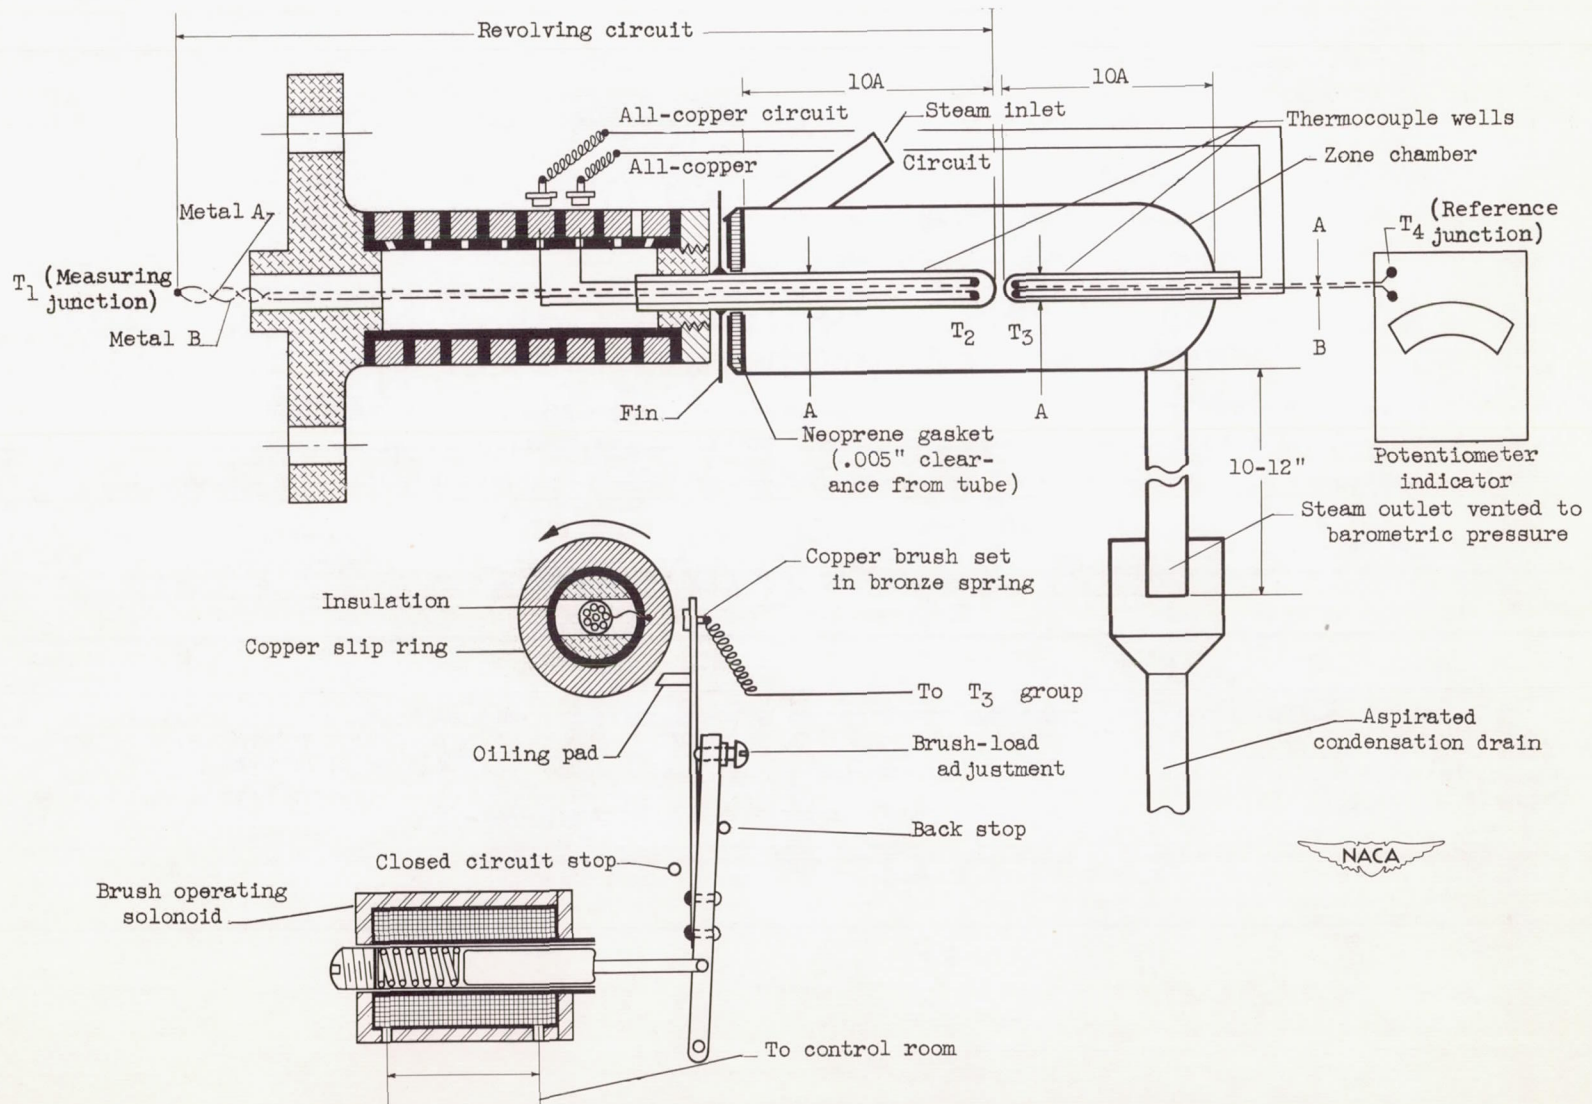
Arrangement of parts in practical shaft-end pickup of compensated type.
